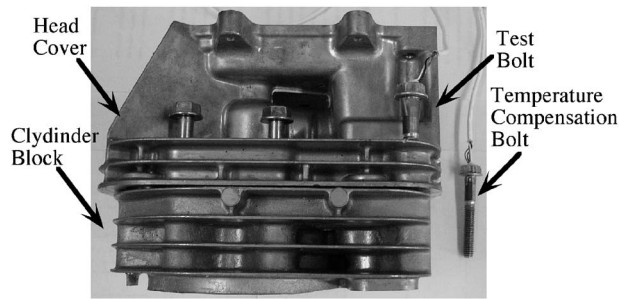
Example of the die-cast engine head joint studied. This geometry was typical of the eutectic Al–Si alloy head joint.
